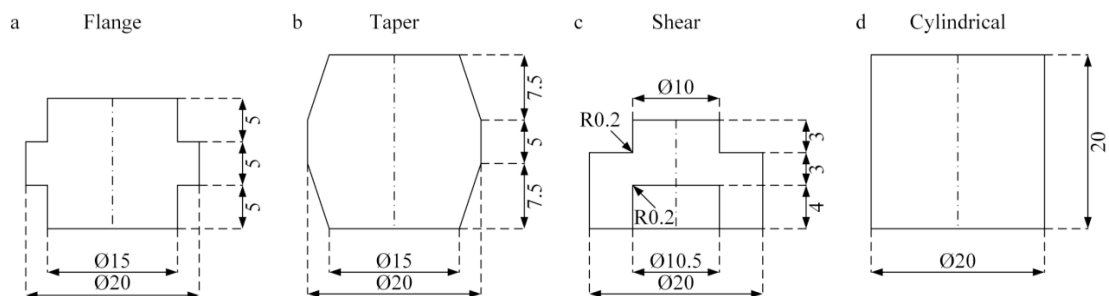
Workpiece geometries utilized for formability determination; (a) Flange; (b) Taper; (c) Shear; (d) Cylindrical.
